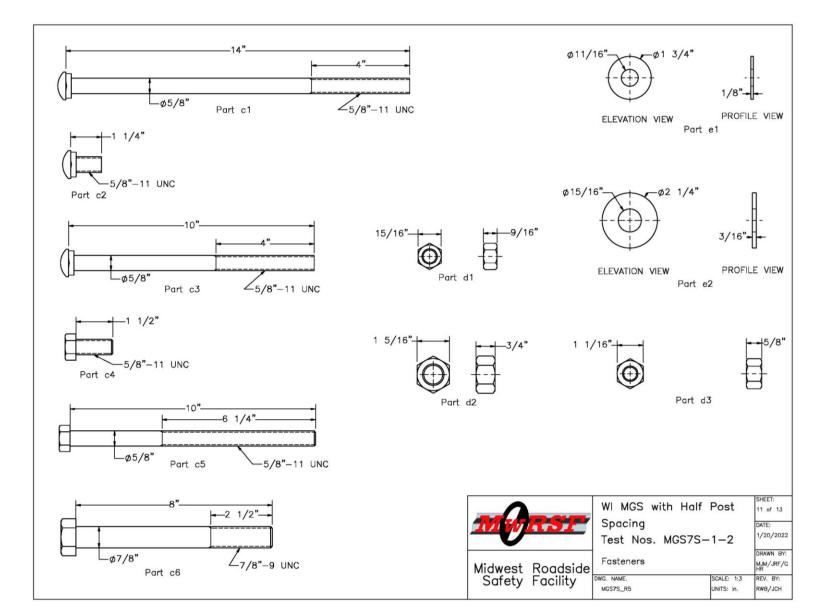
Fasteners, Test Nos. MGS7S-1 and MGS7S-2
